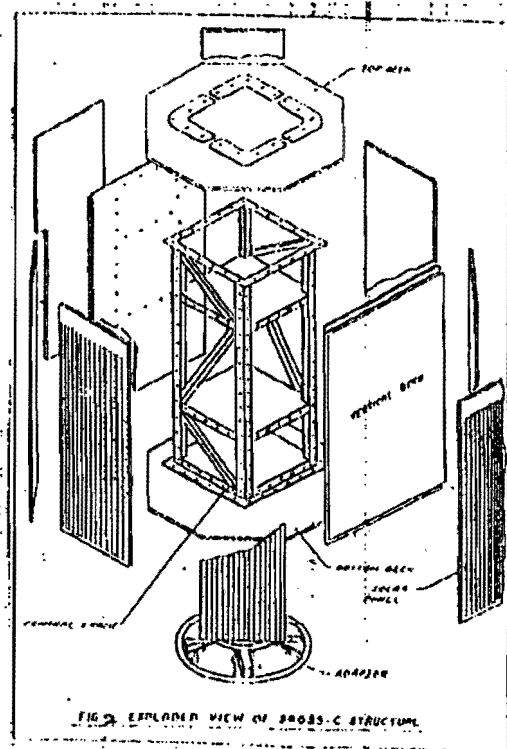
EXPLODED VIEW OF SROSS-C STRUCTURE
